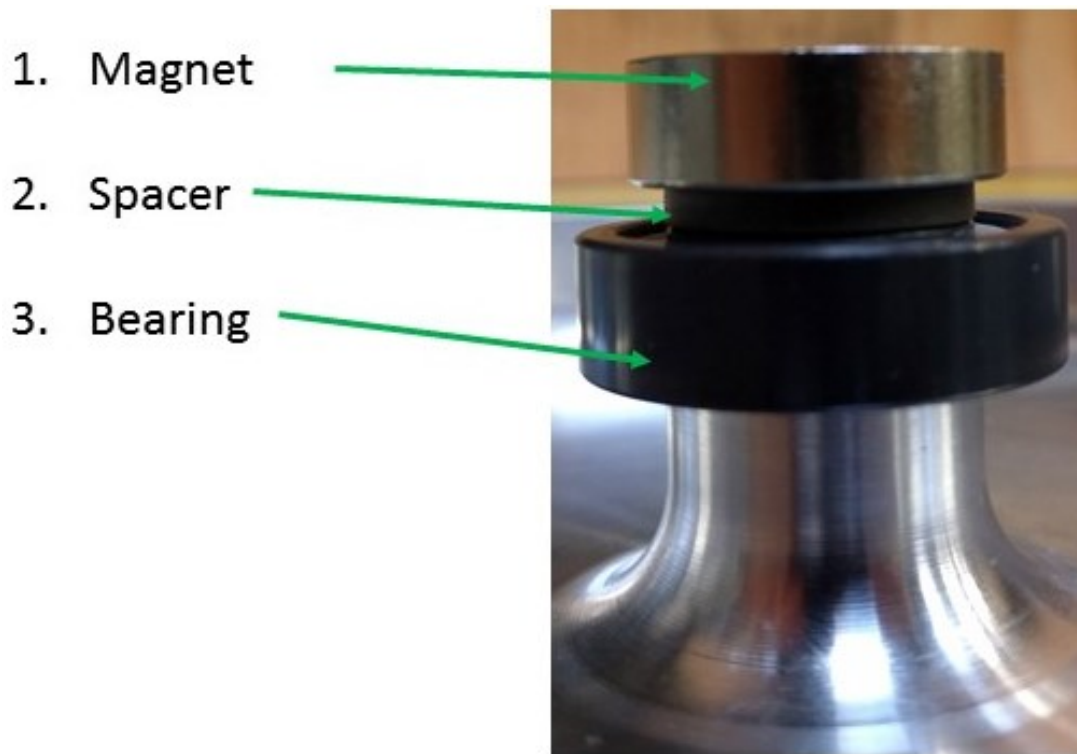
Bottom bearing assembly with the spacer to prevent the race from sliding Note the bearing assembly is shown upside down.
